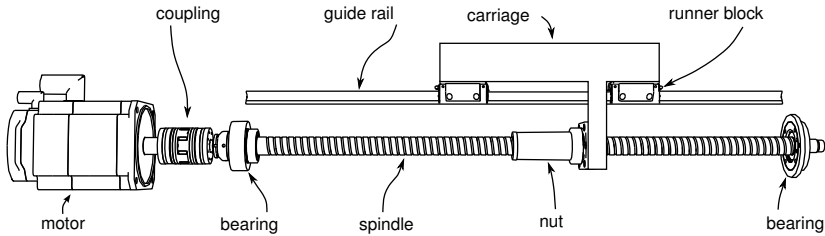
Schematic illustration of a machine axis with a ball screw feed drive
